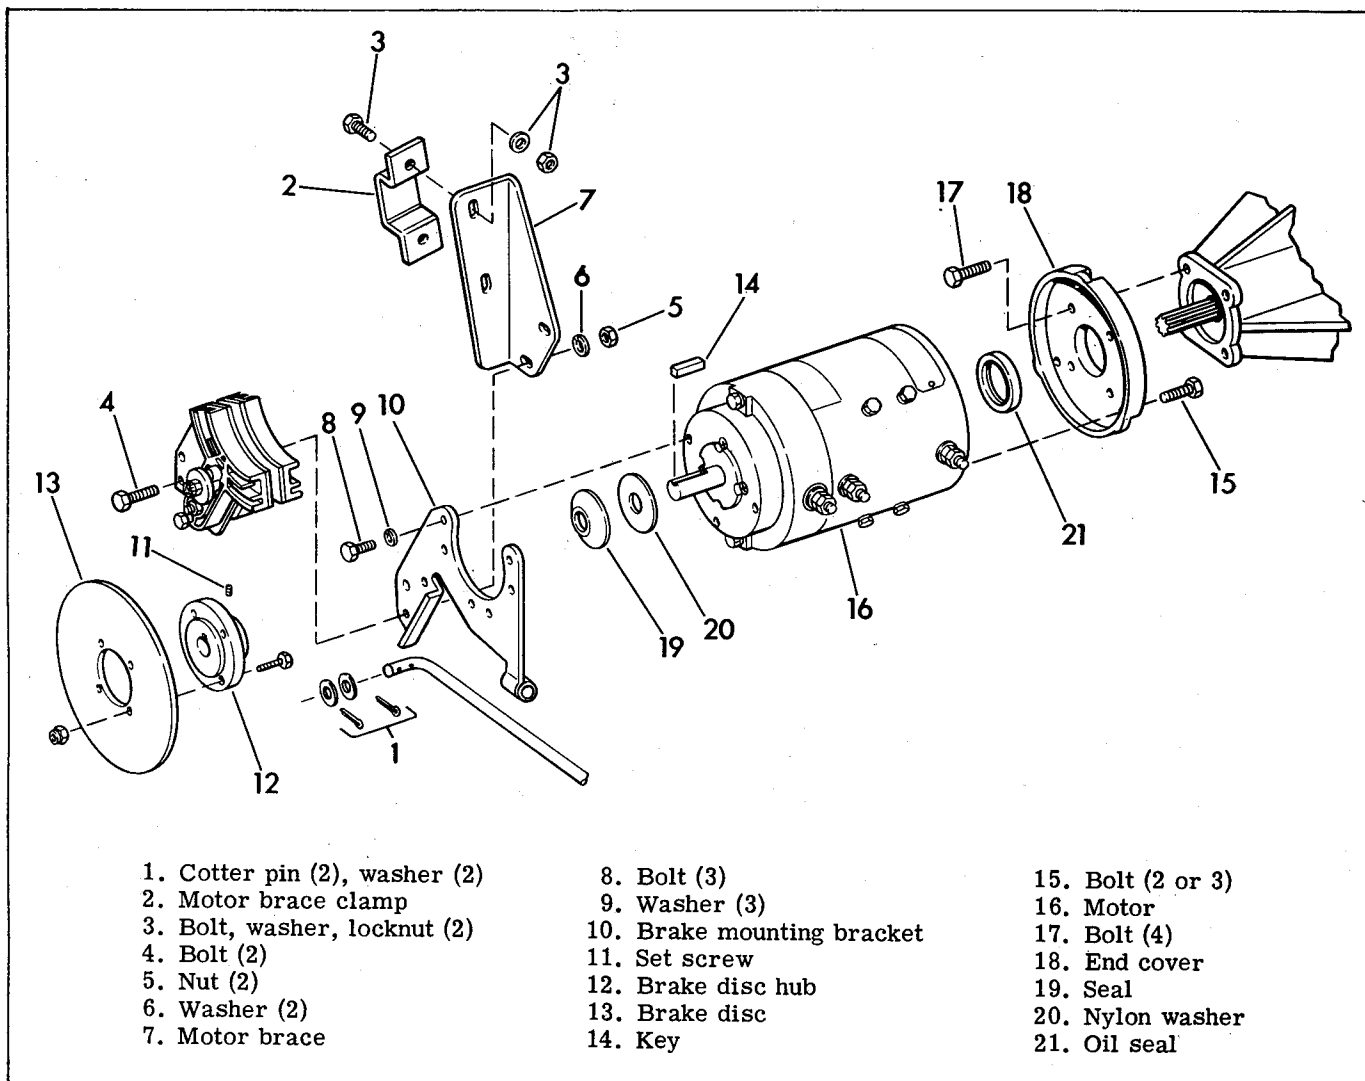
A. Motor and Brake Assembly (1975 and Later Models) - Exploded View
